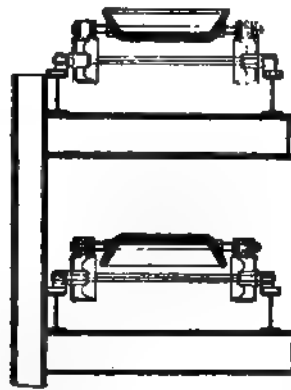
Details of Moulds and Chains in Hawdon's Casting Machine.
